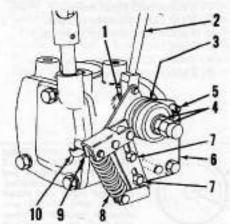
View of linkage control lever and related parts in position to adjust select stop.
